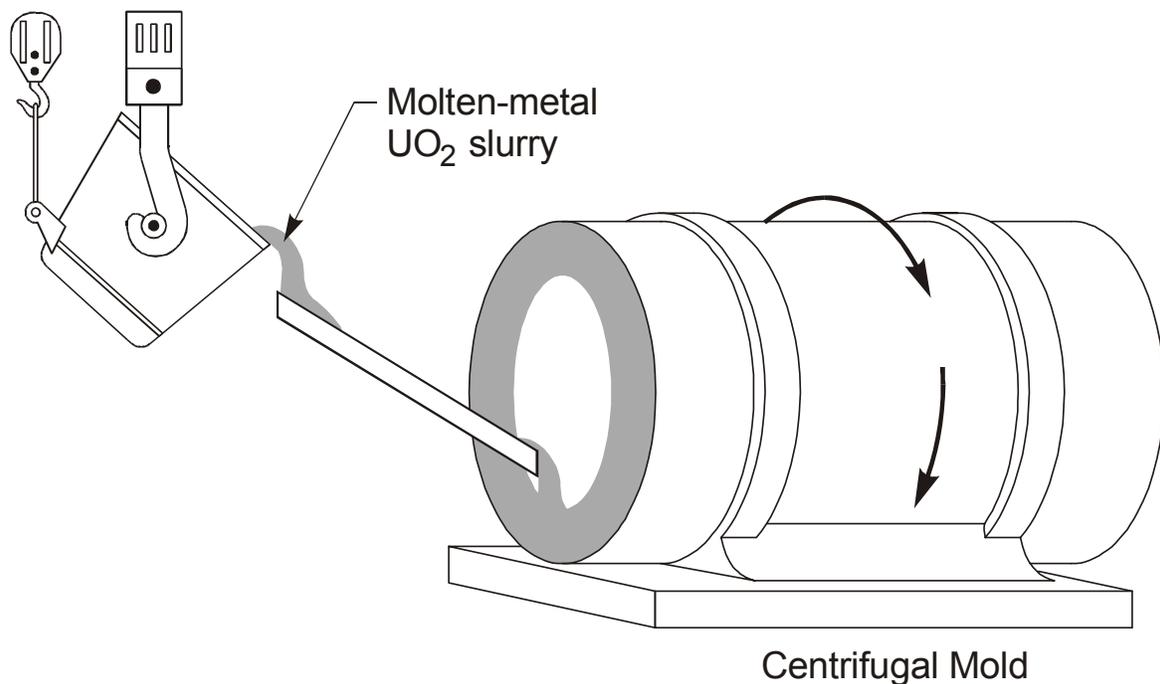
Manufacture of cermet WP body by slurry spin casting.
